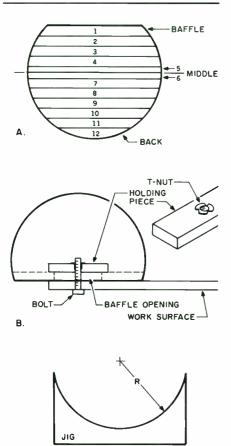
Draw and label layers (A), and use a wooden jig to get a uniform-shaped curve while sanding (B).
